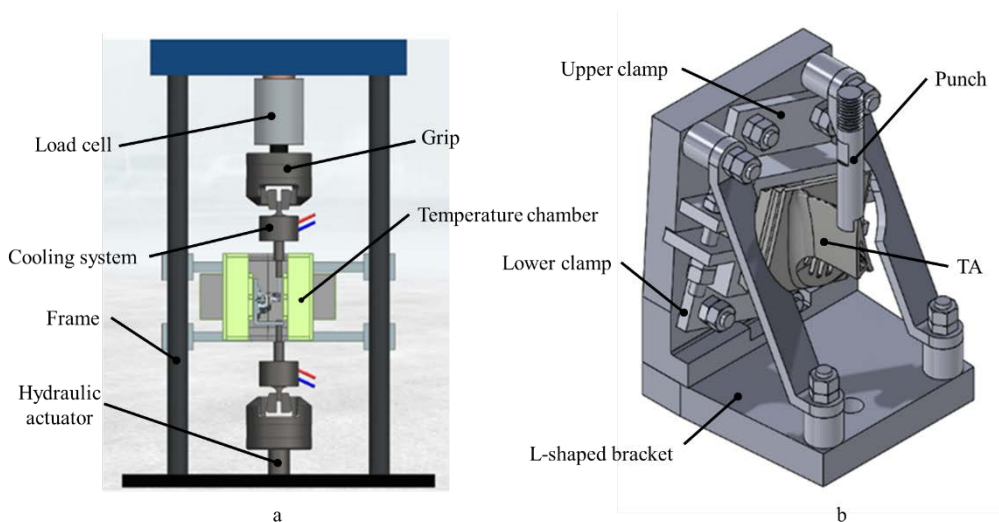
The test rig concept: (a) general schematic view; (b) gripping fixture.
